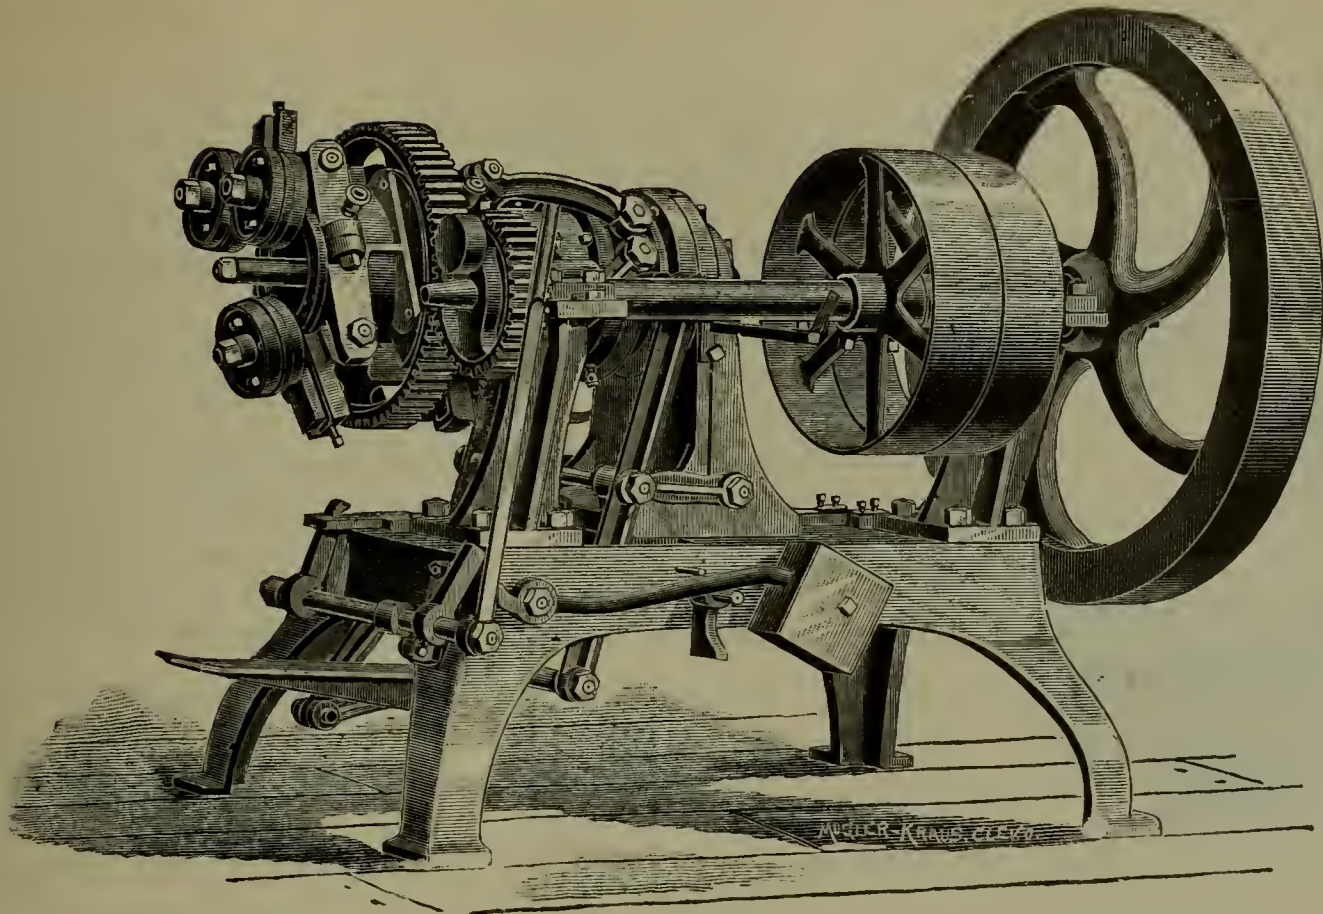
HARTZ FLUE WELDING MACHINE.
